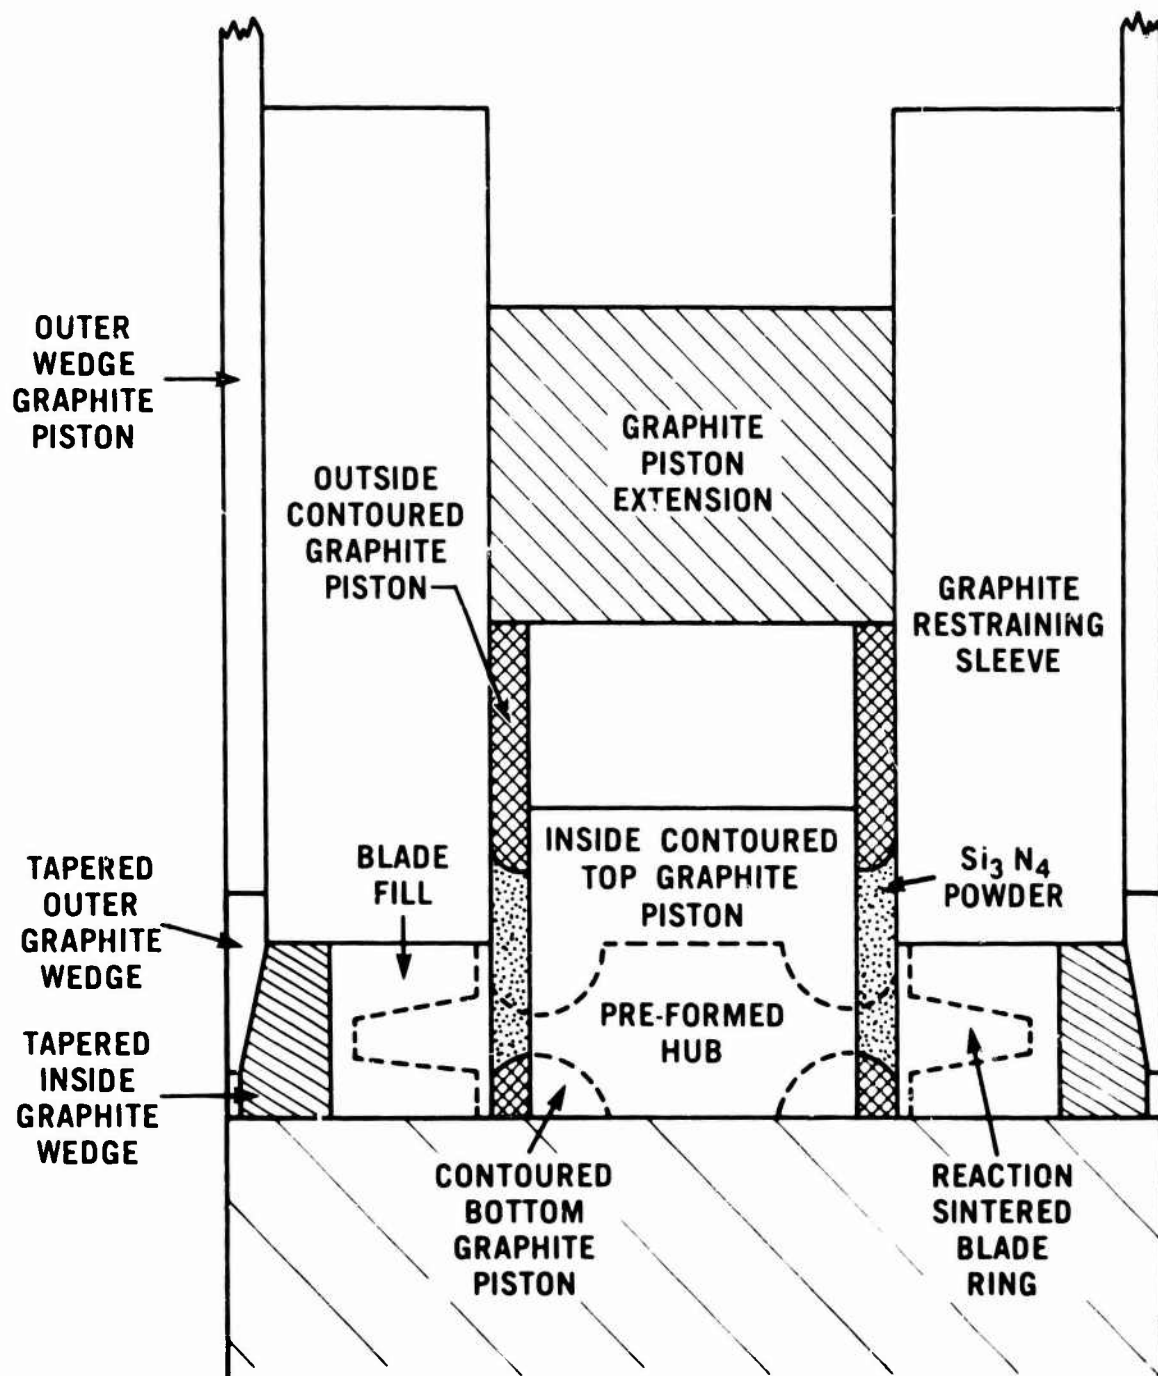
Hot Press Bonding Assembly — Three Piece Duo-Density Concept
